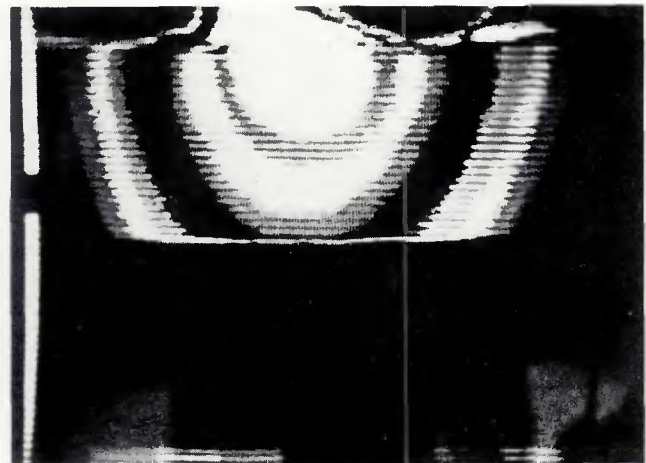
Effect of Cu backing on IR end view of isotherm pattern — thick piece
